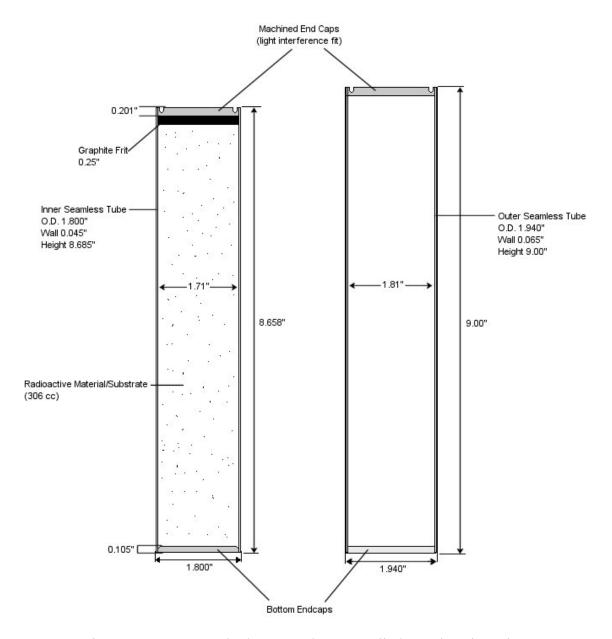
PDP Standard Inner and Outer Cylinders, Elevation View
